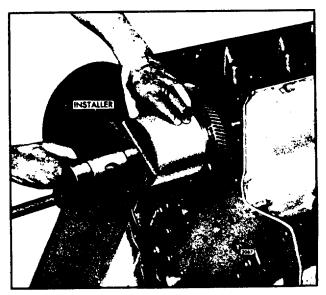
Installing Crankshaft Timing Gear With Installer J 7557
